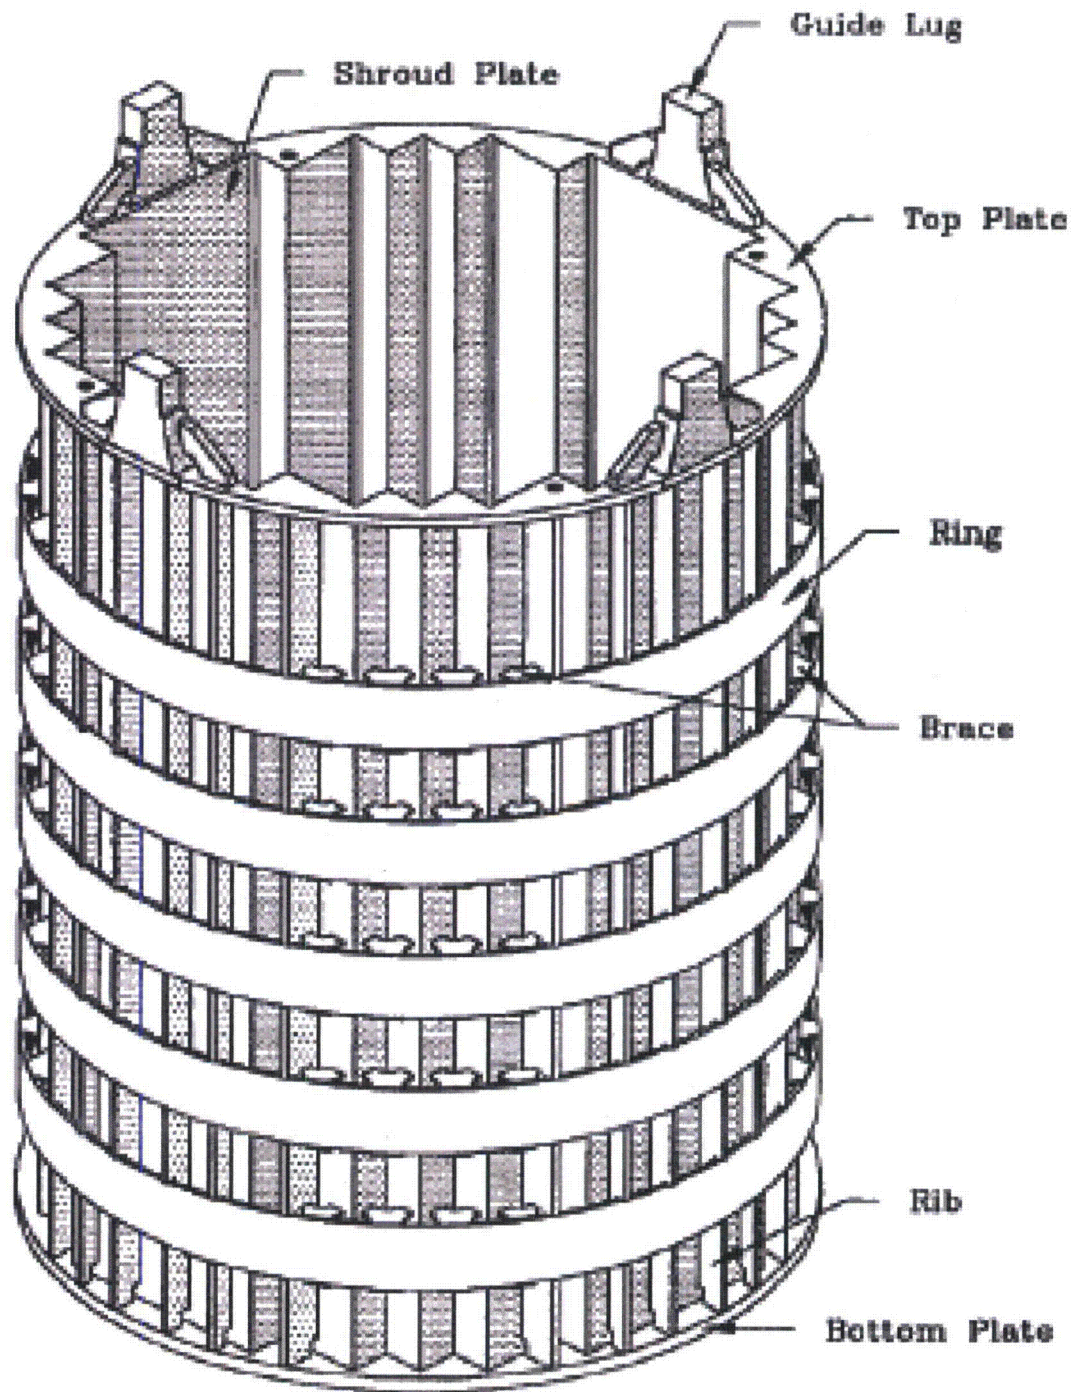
Typical CE Welded Core Shroud with Full-Height Panels
